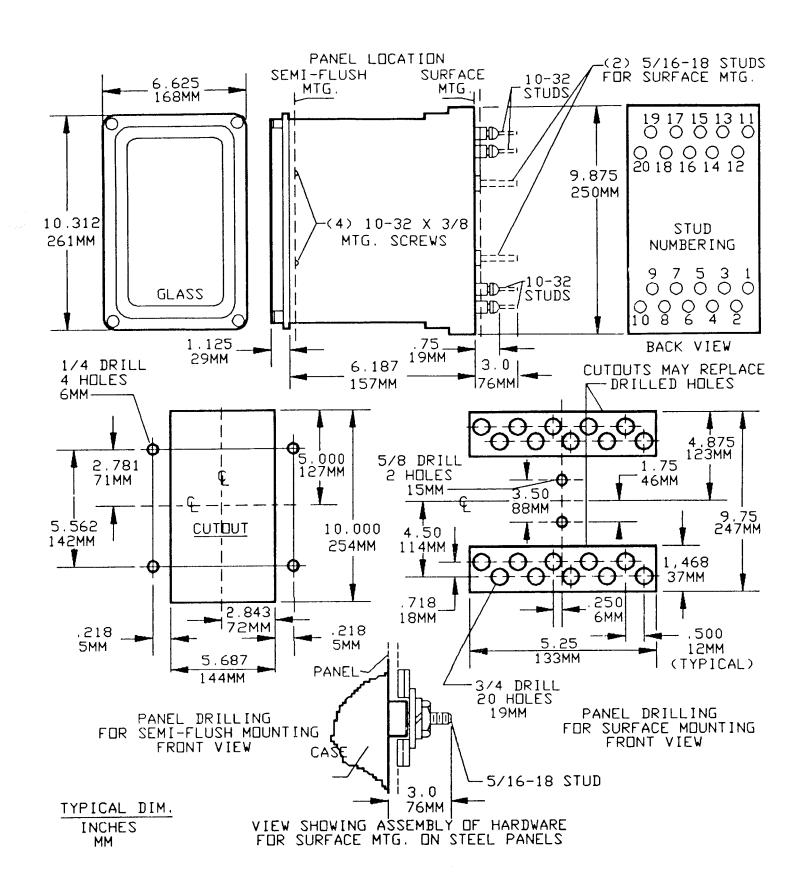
(K-6209272 [7]) Outline and Mounting Dimensions for the S2 Case
